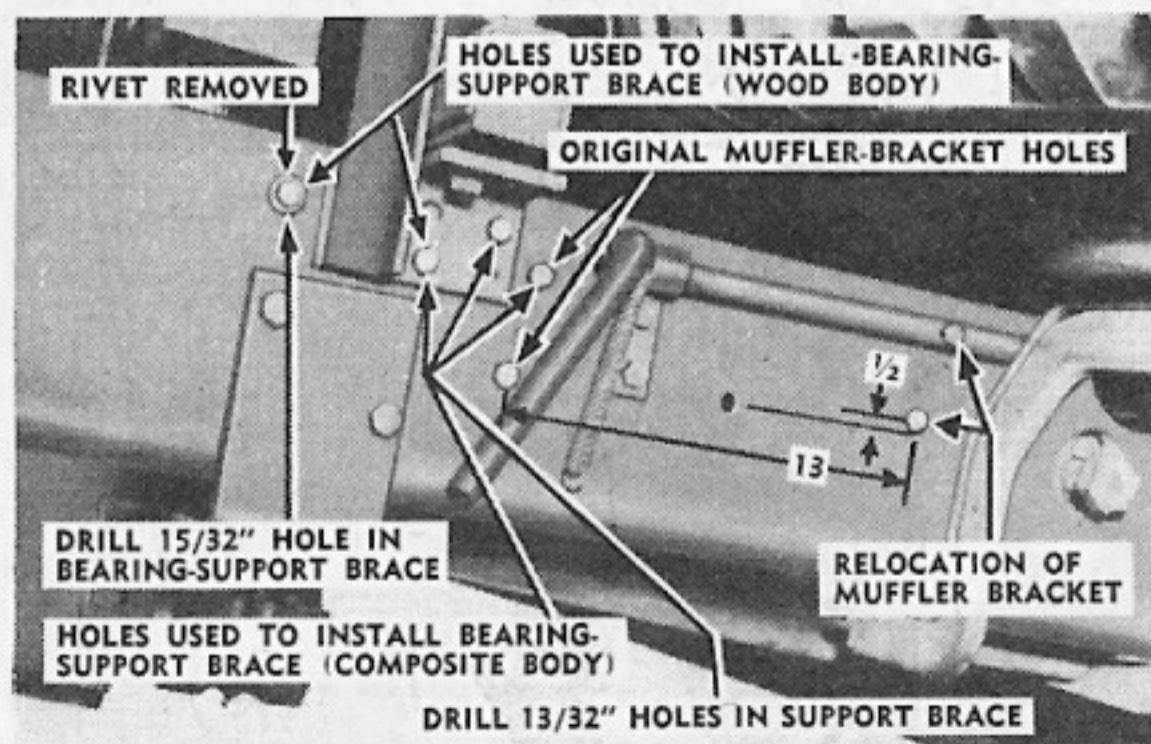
Relocate muffler bracket 13" toward rear of frame and up about ½". Take off chain-tightener-spring bracket. Reinstall exhaust pipe, muffler, and tailpipe assembly. Fig. 4—Use these dimensions for a new bearing support. The bearing-support-mounting holes in the frame and bearing housing can be used as a template to scribe the holes in the support; then drill the holes.
